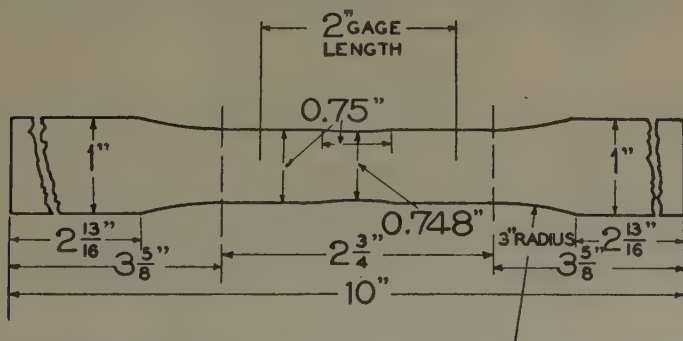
DIMENSIONS OF TENSION SPECIMEN OF SHEET DURALUMIN (14-GAGE) USED FOR ACCELERATED CORROSION TESTS AND FOR EXPOSURE TO WEATHER.
